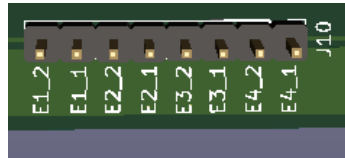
8-pin 2.54 mm pitch male header appearance on the PCB
